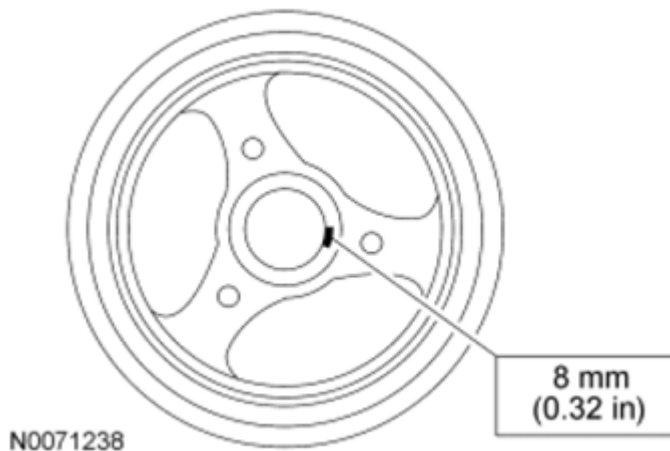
Identifying Sealant Applying Area Of Woodruff Key Slot On Crankshaft Pulley With Specifications
